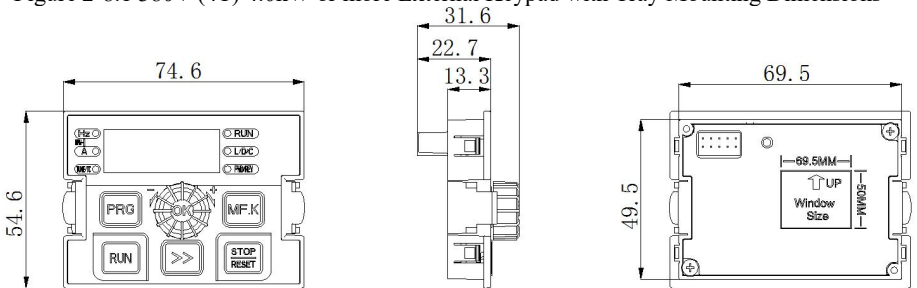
380V (4T) 2.2kW or less external lead-in keypad without tray mounting dimensions
